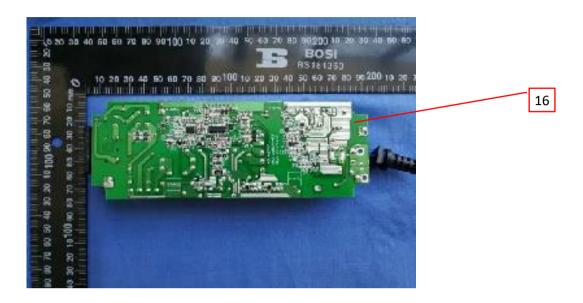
PCB Bottom Side(12.0-36.0V model, Class II)
